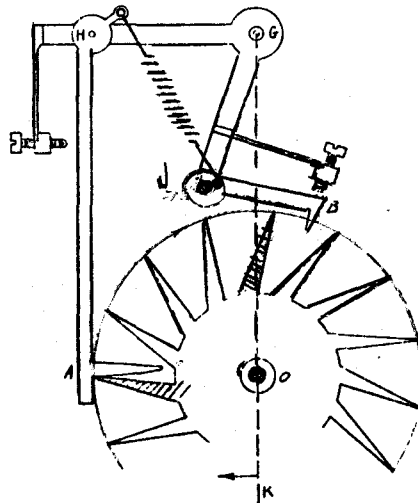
The escape wheel tooth is engaging the entry-pallet (A) and is impulsing the pendulum (K) to the left. The exit-pallet (B) is seeking engagement with its nearest approaching tooth
